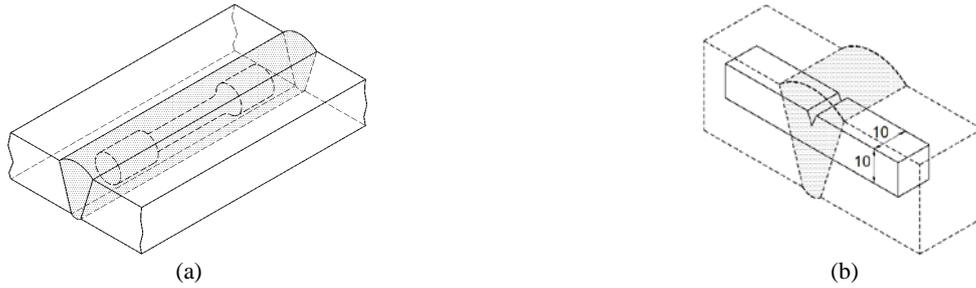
Relative position of specimen in relation to the weld joint: a) Tensile test and b) CVN
